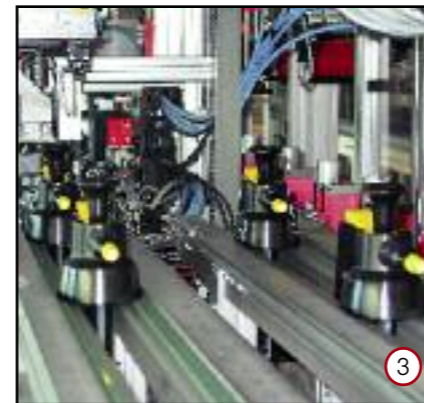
We produce our Compressed Air Sprayers by means of computer-controlled system assembly. Our quality control system also uses state of the art technologies. After a leak and safety valve test, each device is marked with an engraved device test number. We archive this data in the interest of your and our safety (Product Liability Law).
